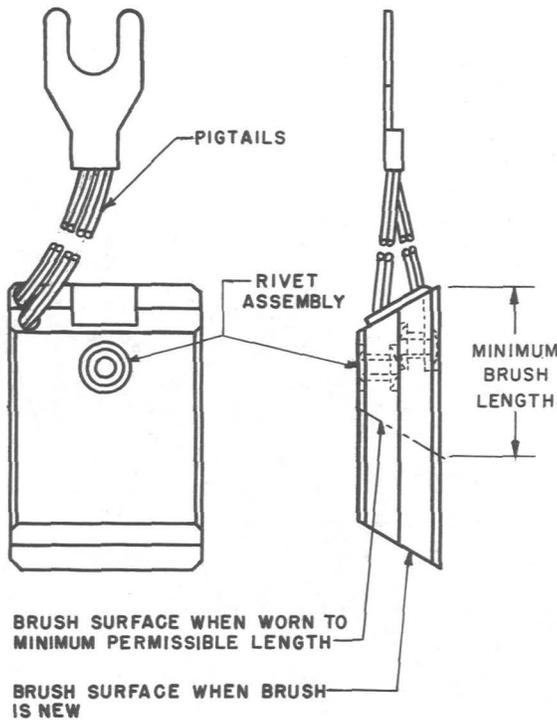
Dual Brushes — Pigtails Secured by Rivet
